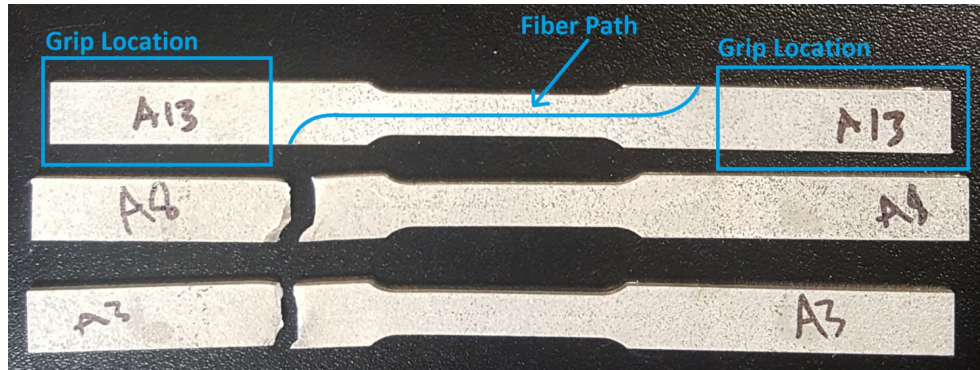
Initial fatigue coupons failed outside the gauge region due to the fibers exiting coupons outside the grip region.
